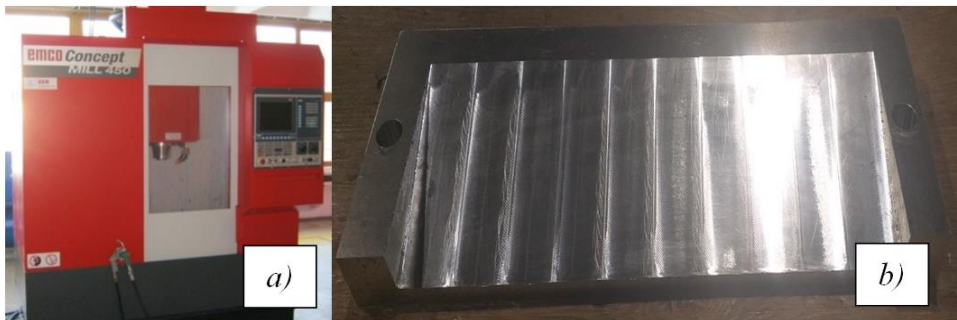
a) *EMCO Concept Mill 450 machining center*; b) *aluminum workpiece Al7075*;
